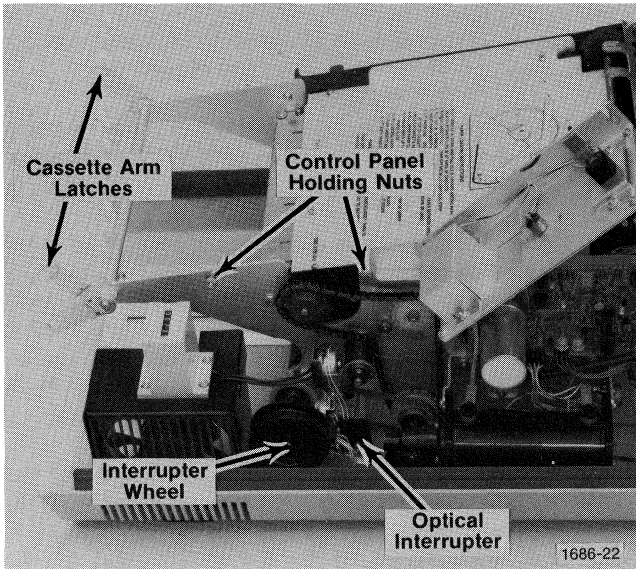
Location of control panel holding nuts. Cassette arm latches and optical interrupter (control panel shown in raised position).
